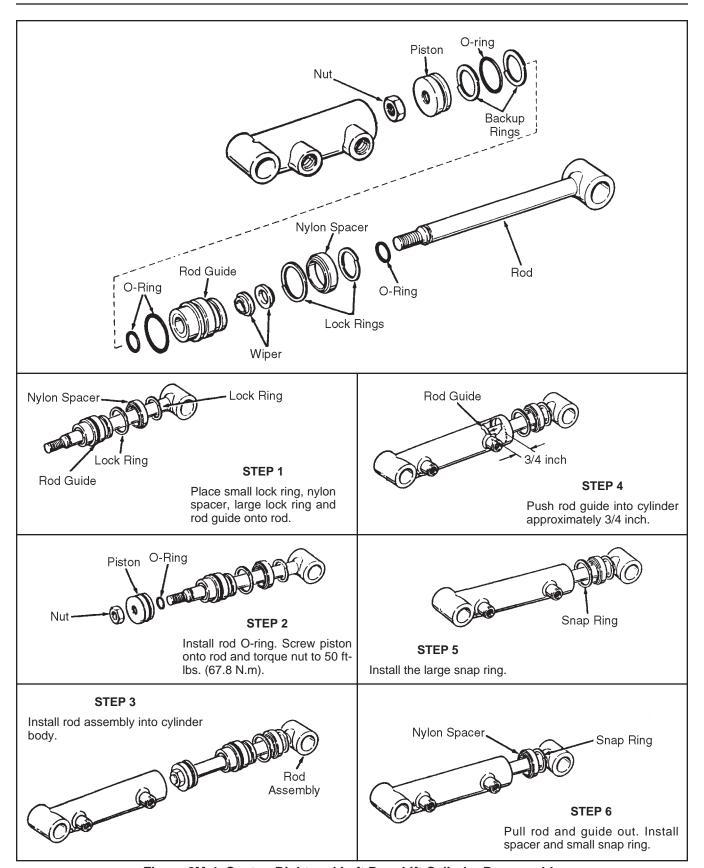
M-4. Center, Right and Left Rear Lift Cylinder Reassembly
